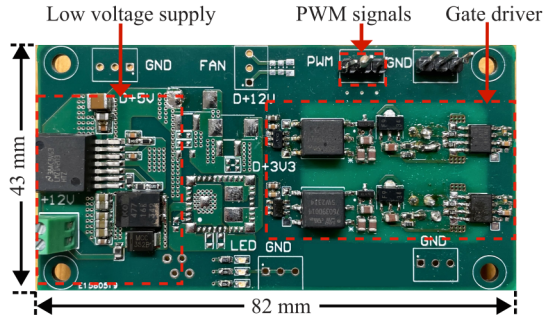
Six-layer gate driver board fabricated on FR4 substrate with 1.6 mm thickness.
